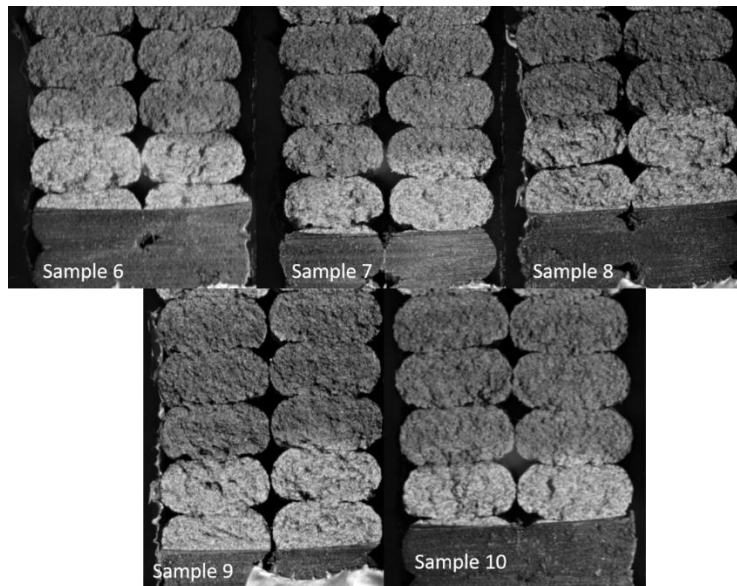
Fracture surface of the SCB 33.02mm radius specimens printed at 230°C.
